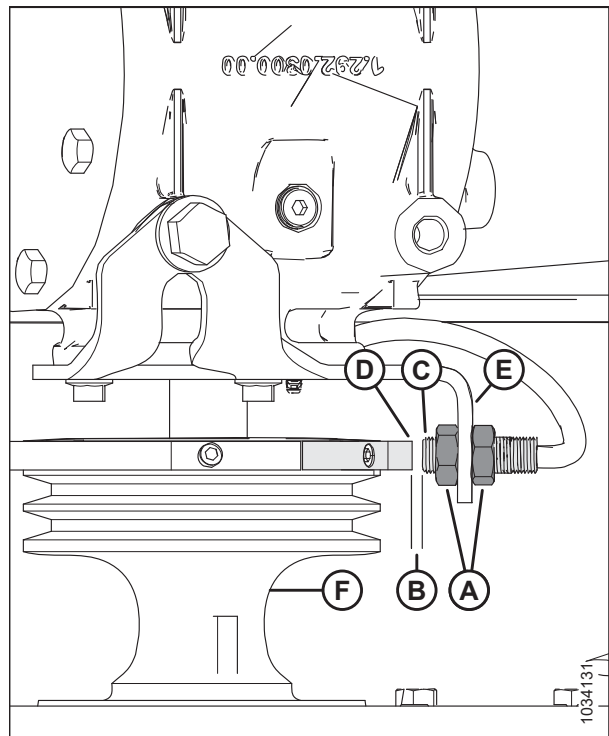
Header Disc Speed Sensor – M155E4 or M205 SP Windrower Sensor Encoder Shown
